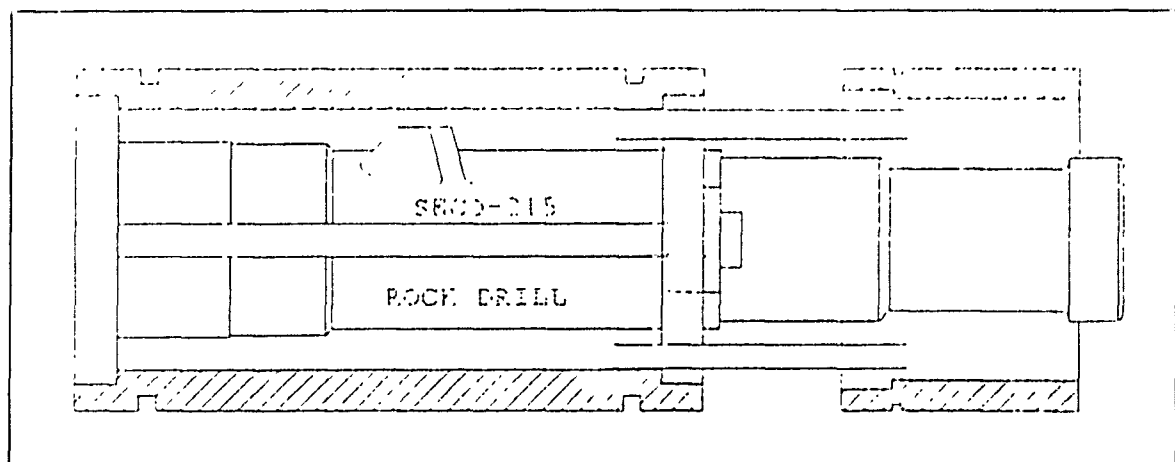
b Pi-reactive muffler arrangement on a SECO 215 drill
